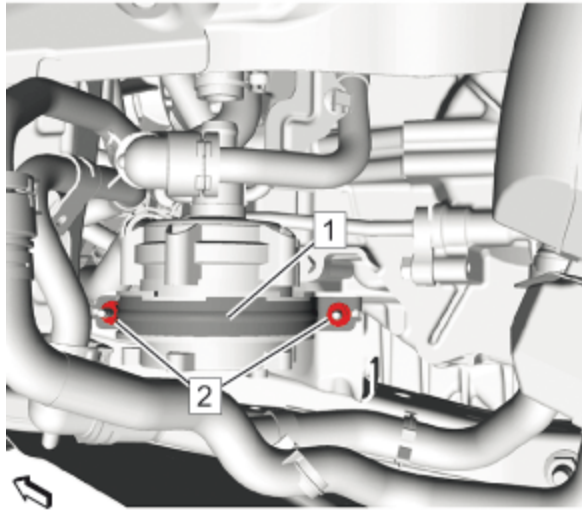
Generator Control Module Coolant Pump Bracket And Nuts
